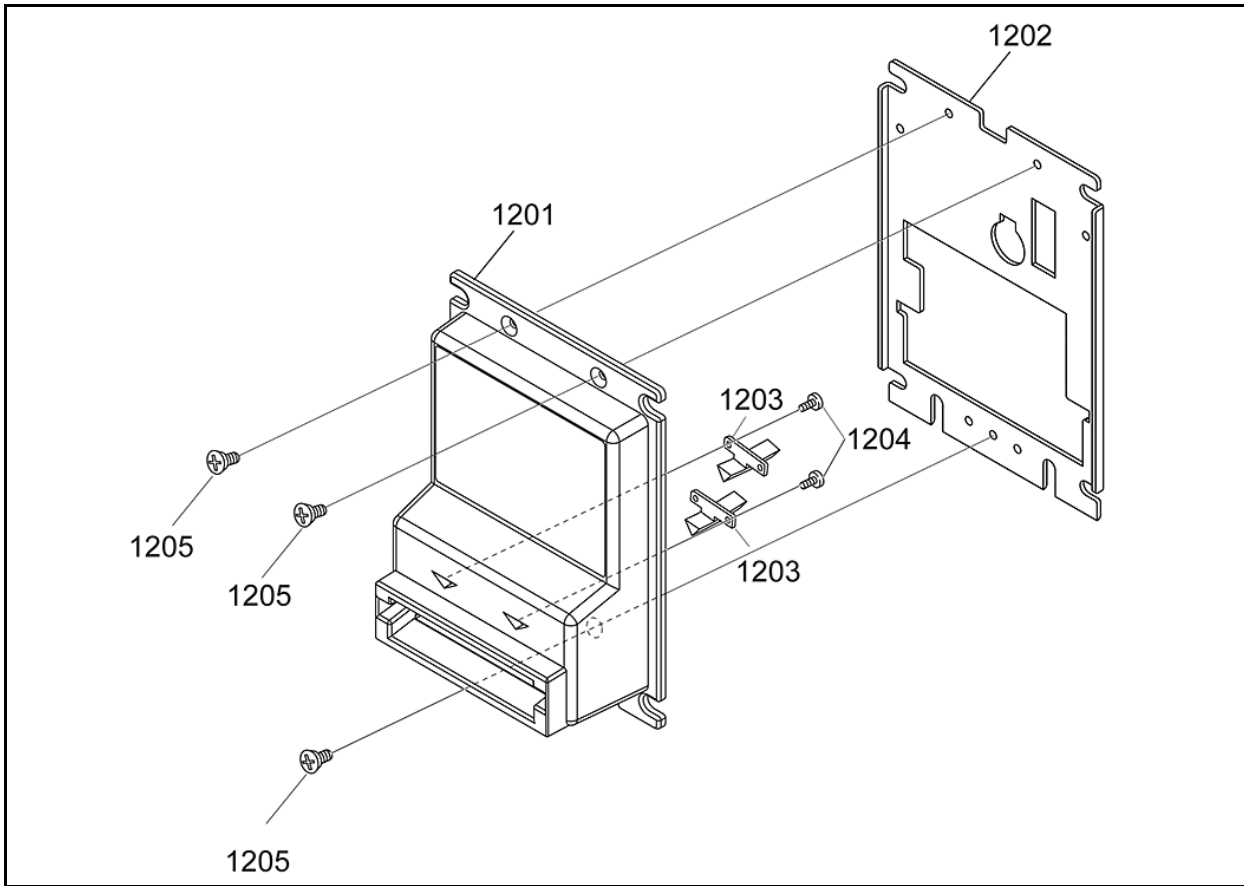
DBV-30X-SU Type 2 Bezel Kit Assembly Exploded View
